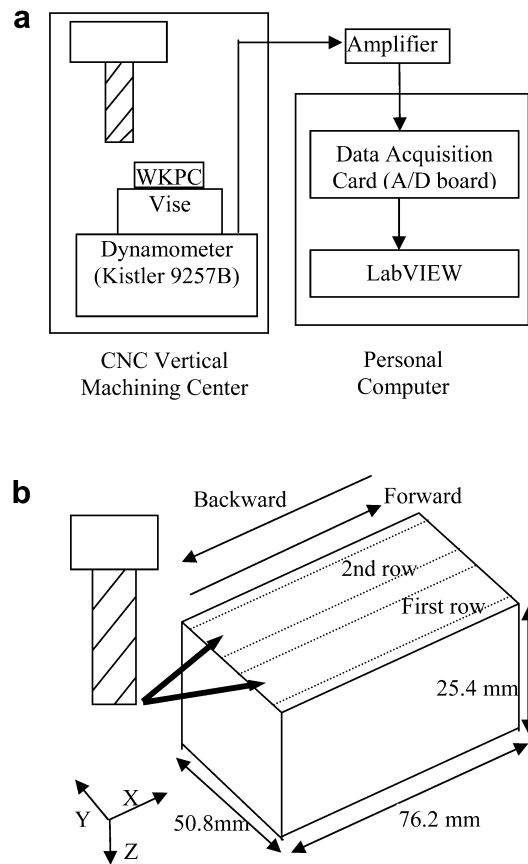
, b Experimental set up and machining. a Schematic diagram of experimental set up. b Schematic diagram of machining
